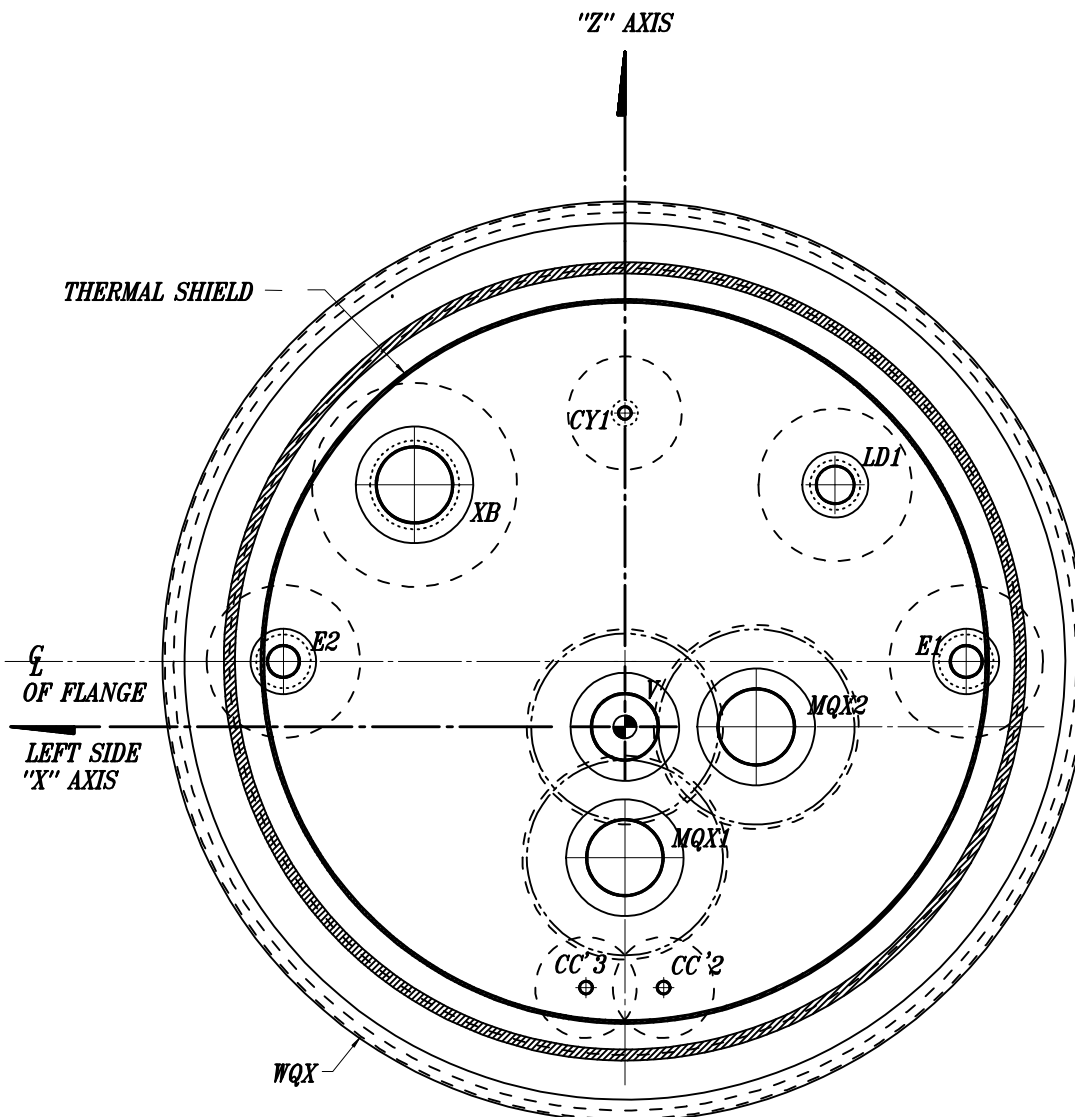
DFBX (high-side) 50-mm automatic orbital welder clearance envelopes shown as dashed lines between flanged pipe ends for piping weld connections at interconnect plane. 45-mm clearance also shown for V, MQX1 and MQX2. (Thermal shield does not extend into interconnect region.)
